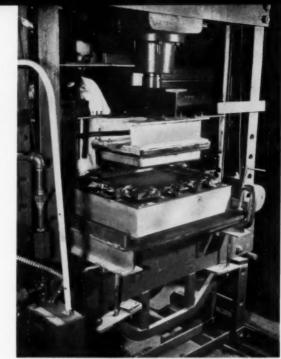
After sheet in clamping frame has been heated in 400° F. oven for 7 min., and while it is still hot, it is placed on top of mold. Guide pinnin mold and corresponding holes in frame insure accurate placement
